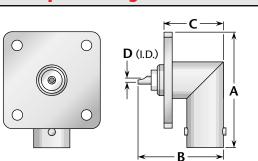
(Solder pot contact, 1" square flange, interchangeable with type N standard flange size)
